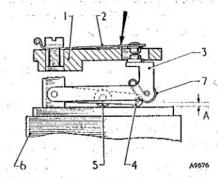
The contact gap setting on earlier-type rocker assemblies
